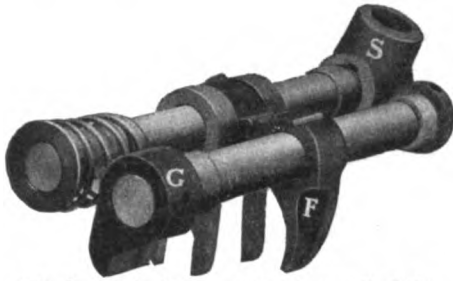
Neutralizing mechanism unit of the Vulcan electric gearshift
